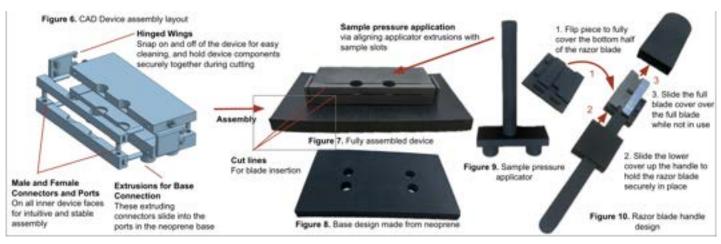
Latest Prototype with detailed explanation on parts & mechanism (made by Ella Lang*)
